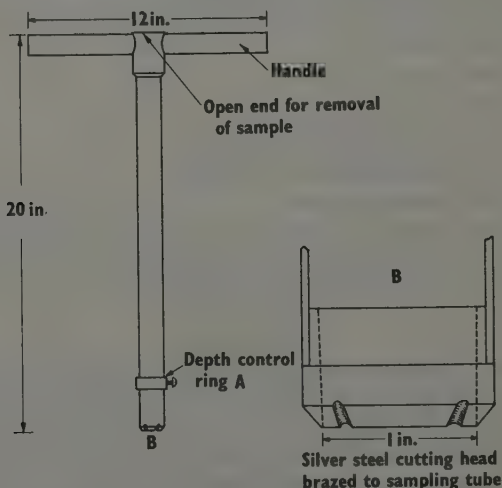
Soil-sampling tube (mild steel handle and collar welded to stainless steel tube ext. diam. $1\frac{1}{4}$ in., int. diam. $1\frac{1}{8}$ in.).
